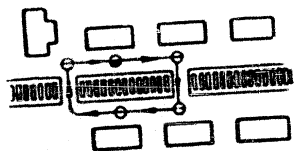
Arrangement of Machine Tools on Building Sides of a Roller Conveyor for Simultaneous Serving
